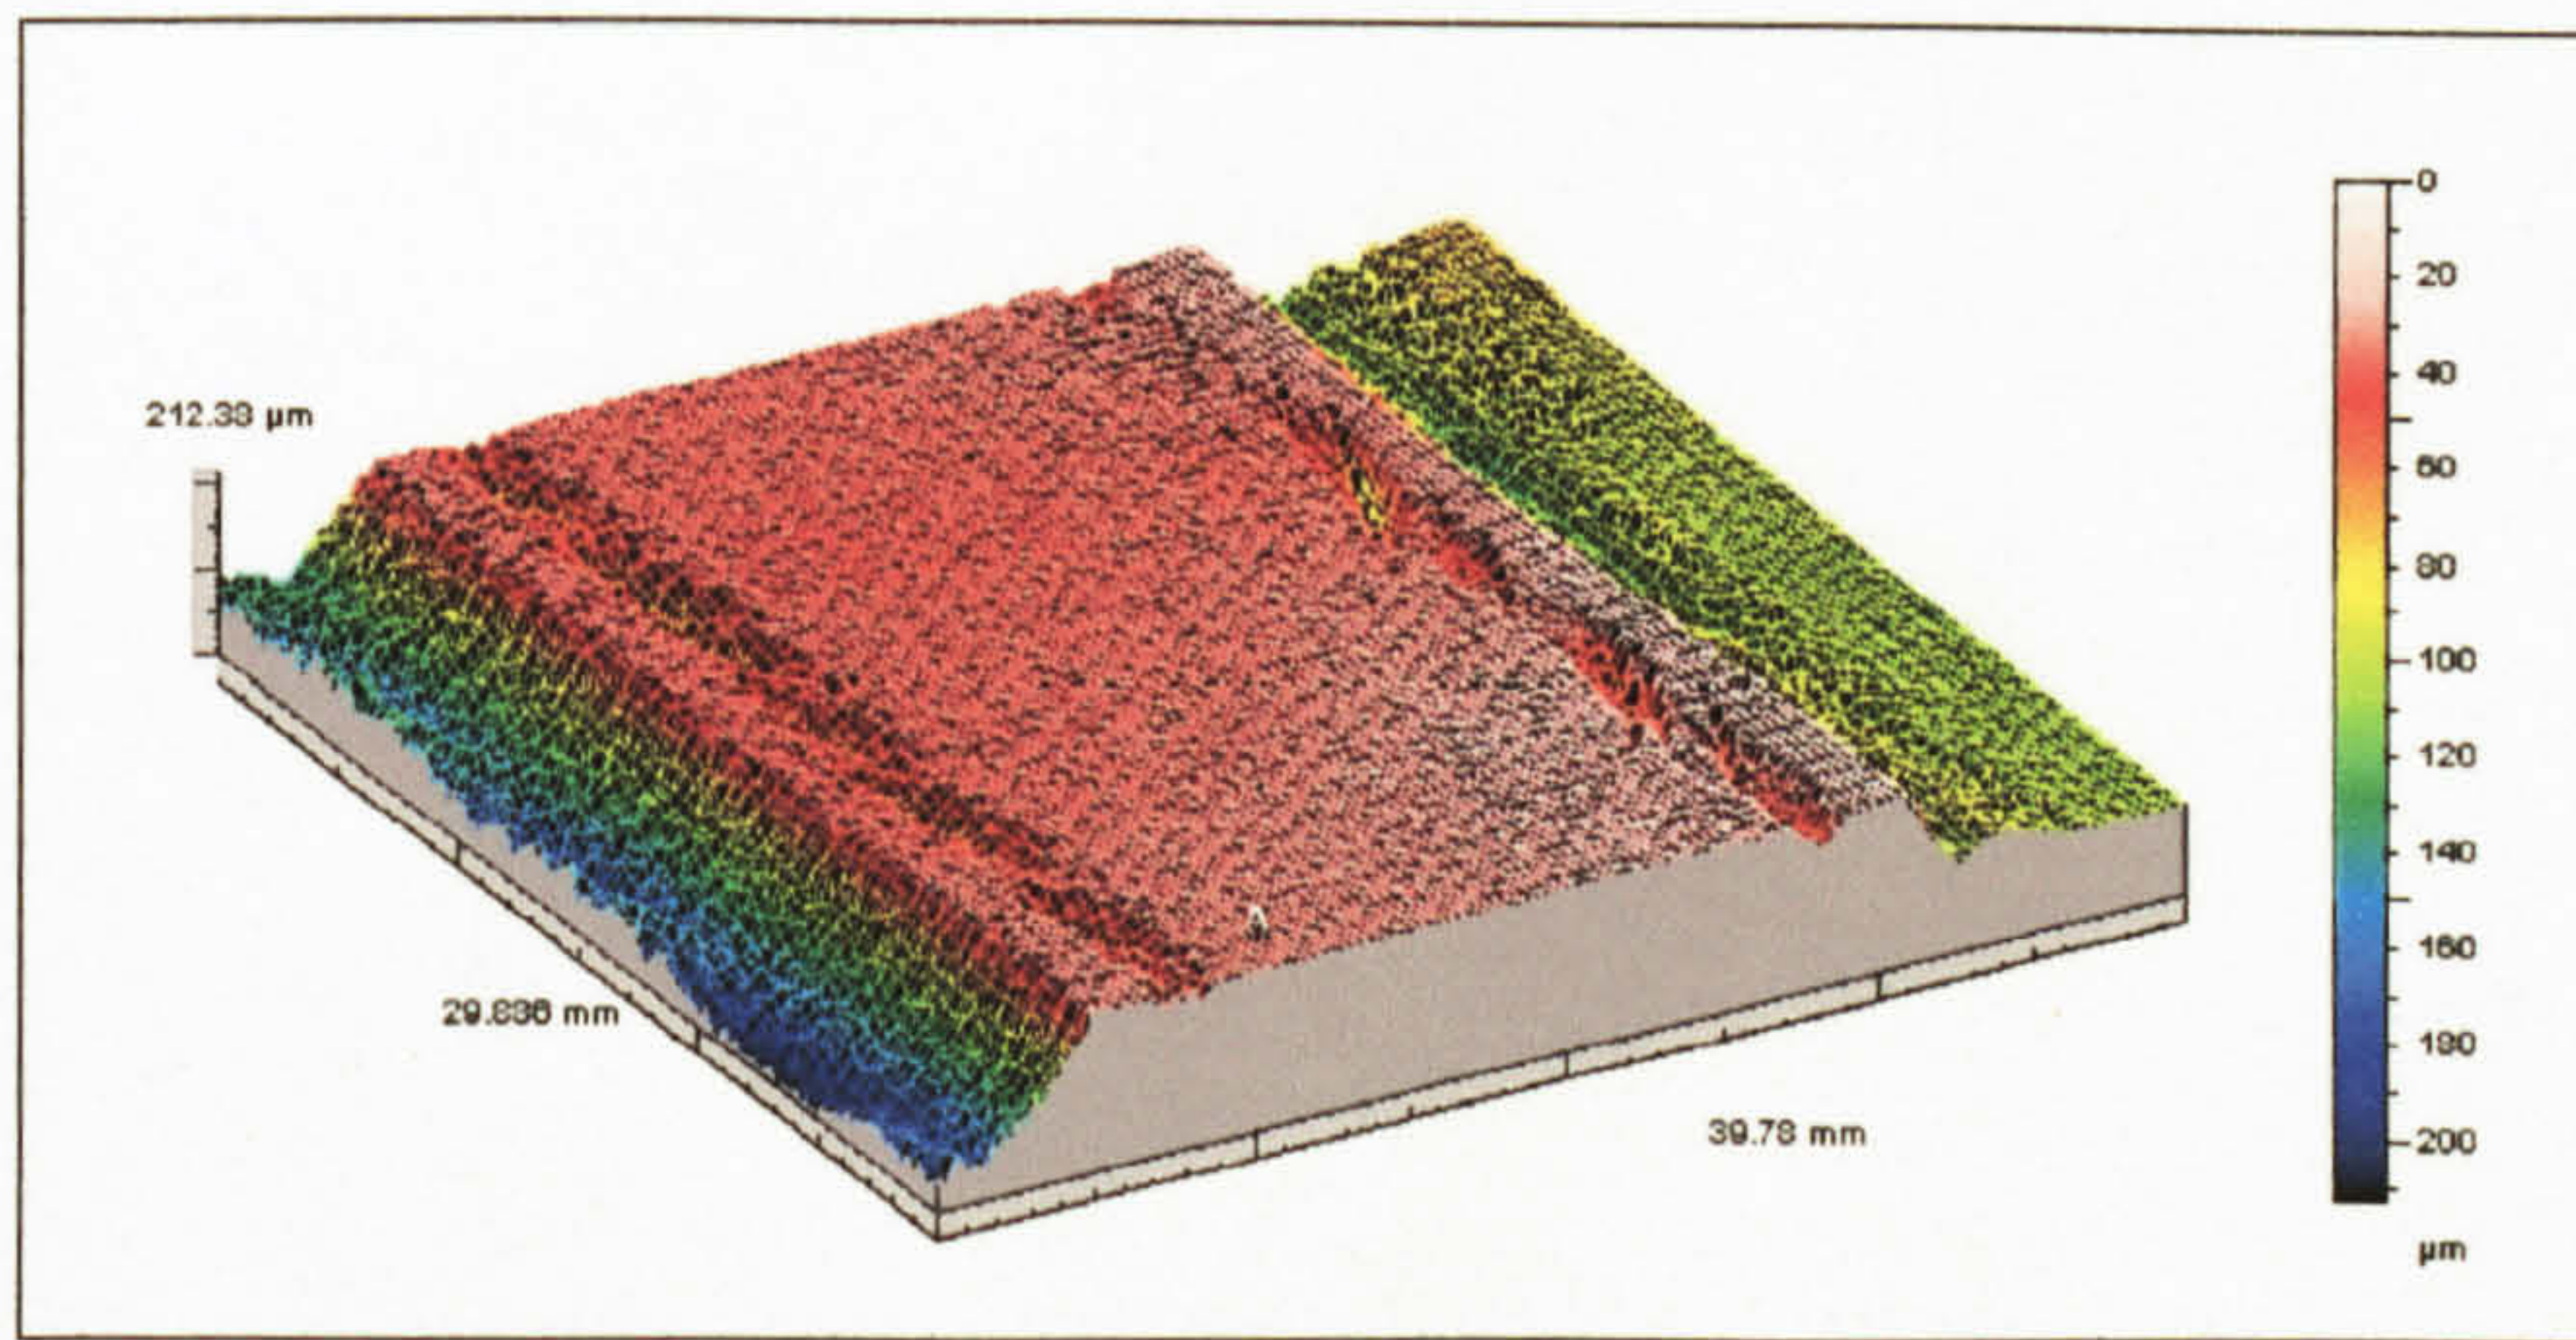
Three dimensional representation of the geometry of the 1st pass side of a FS DP weld in AA 5383-H321.
